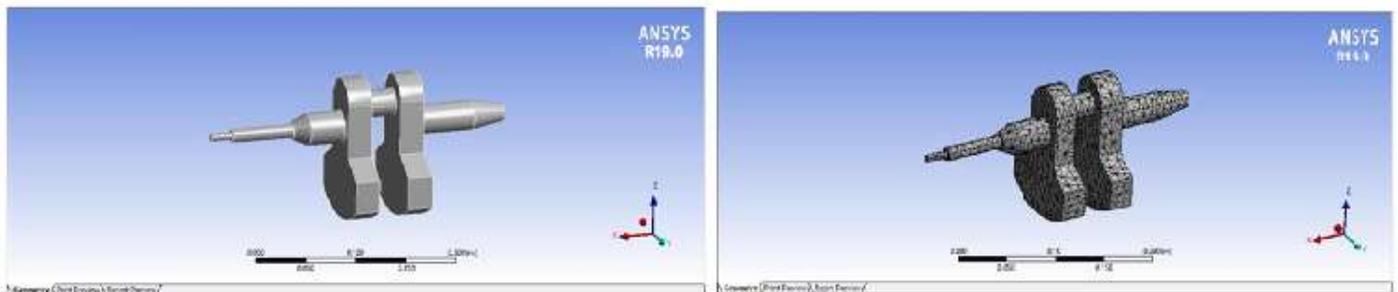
Model of Crank Shaft & Mesh of Crank Shaft
